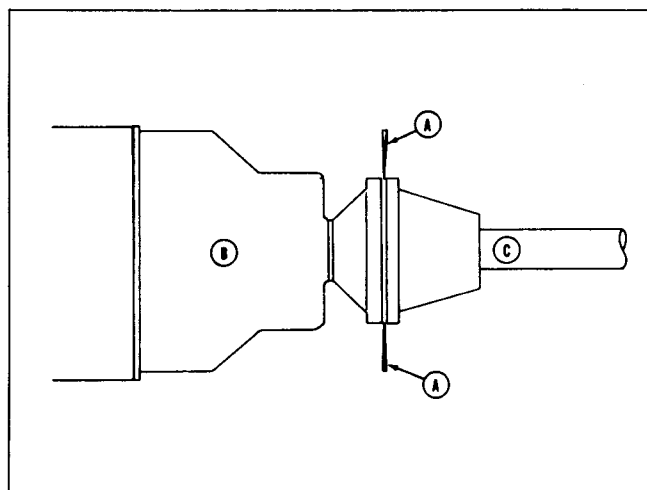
, (V11967). Checking alignment between marine gear and propeller shaft
